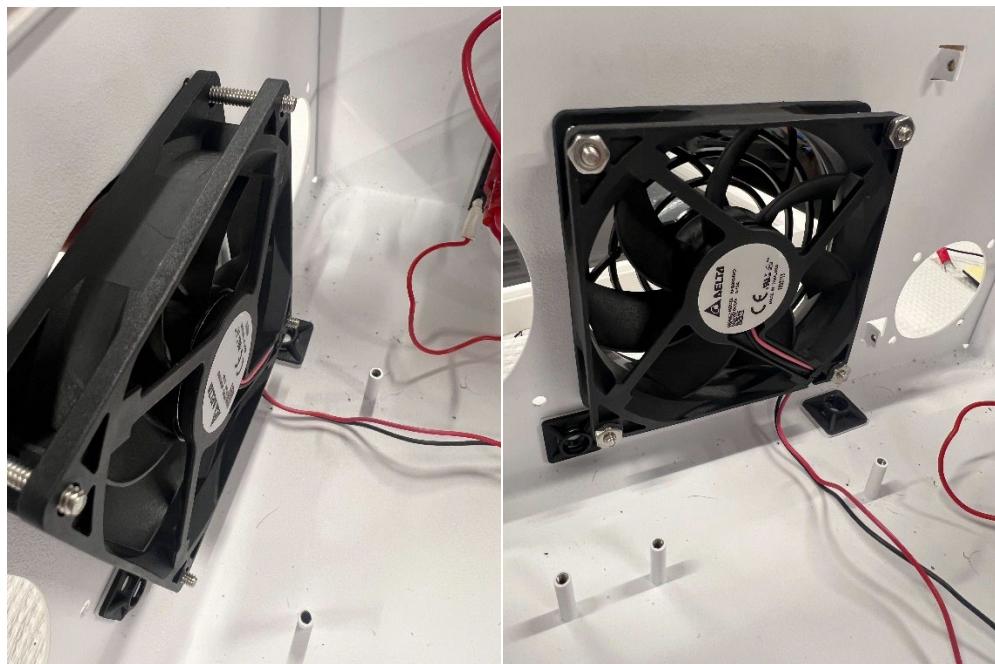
Alignment and mounting of fan with mounting screws (left) and with nuts tightened (right)
